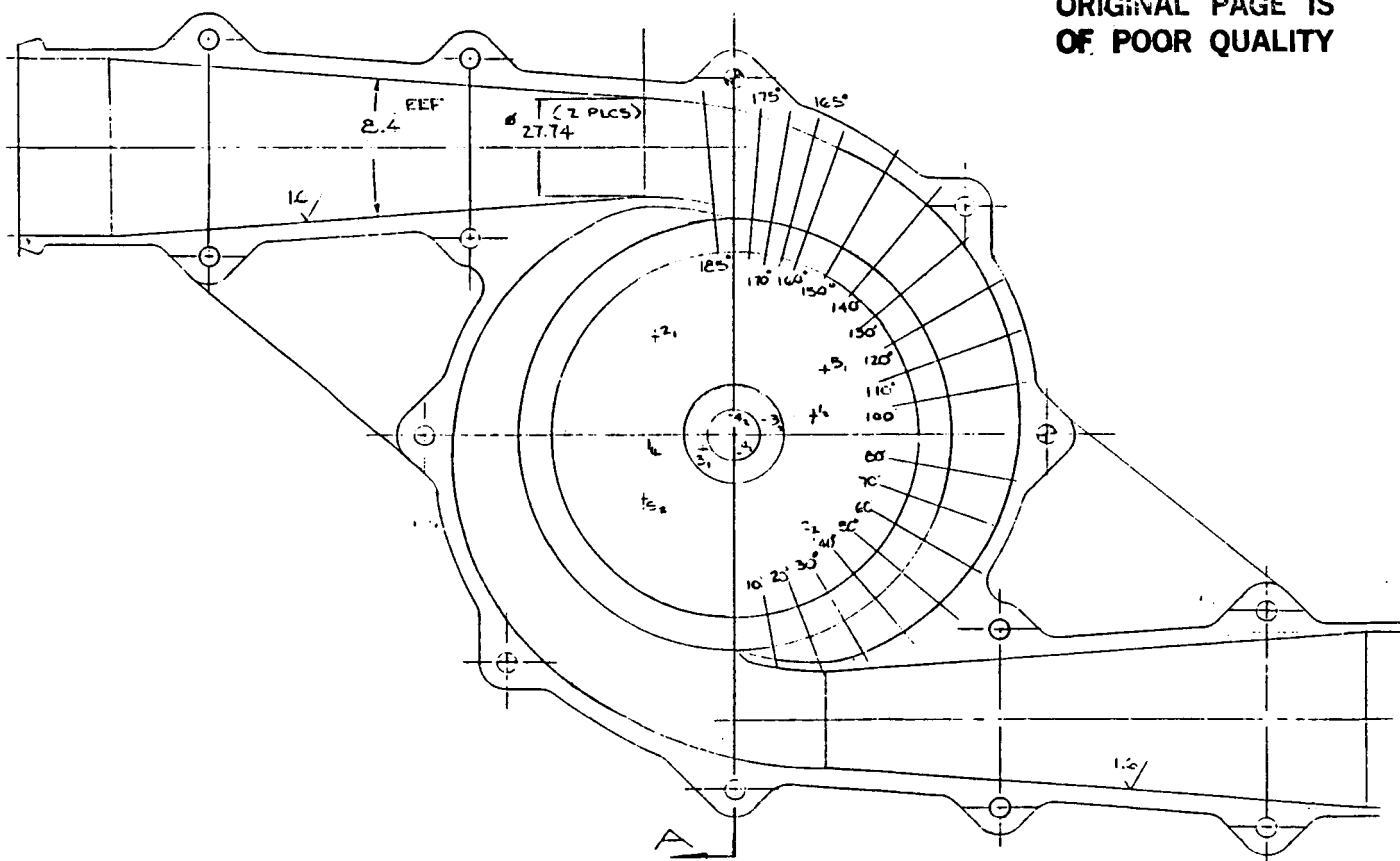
Mod II, 12,000 rpm Alternator Assembly
